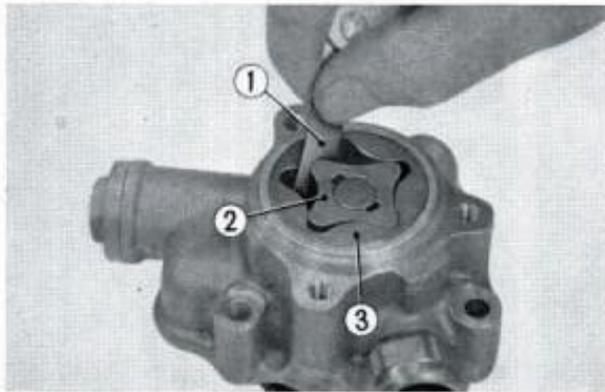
① Feeler gauge ② Inner rotor ③ Outer rotor
